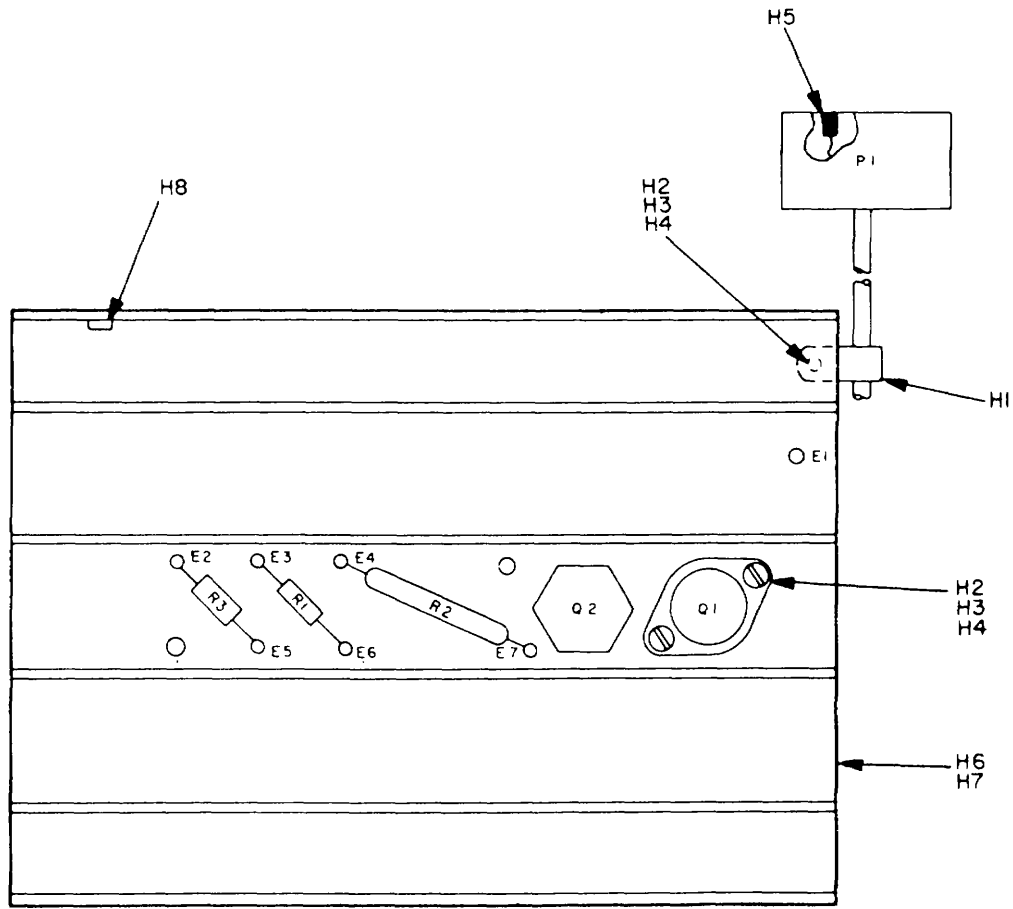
Power supply PS1 heat sink components assembly A5.
